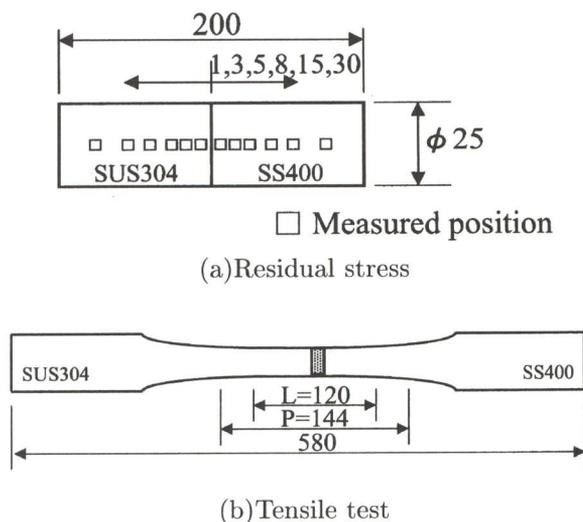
Measurement point of the specimen(a) and dimensions of a specimen for tensile tests(b).
